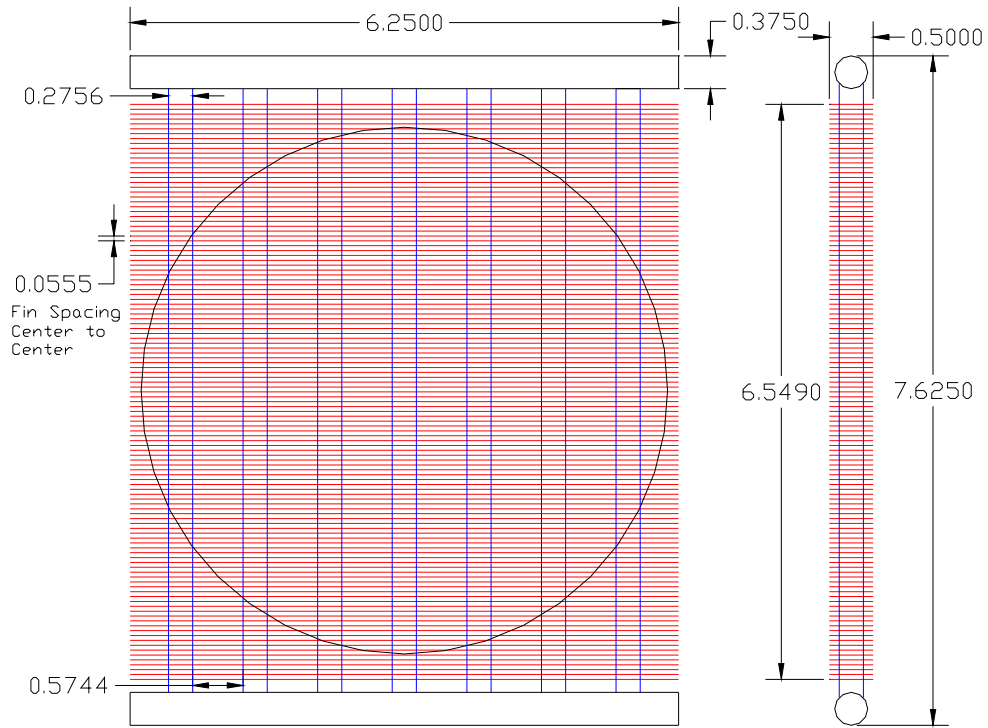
Drawing of Fin-tube Heat Exchanger (dimensions in inches)
